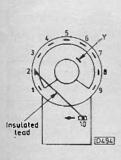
The modified tube base socket, which has integral spark gaps to prevent the failure of i.c.s as a result of flashovers When fitting this socket to the PCB, pin Y must be cut off so that it does not protrude beyond the central boss and bend pin 10 in the direction shown by the arrow. After fitting to the PCB, connect a length of insulated wire between pins 2 and 10. It should be 50mm long and stripped back 7mm at both ends. Wrap the wire once around pin 10 and dress it away from the copper track.
